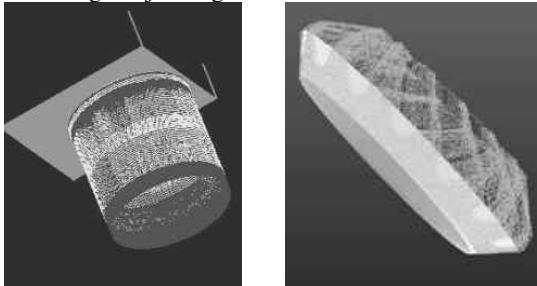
cylinder and plane fitting Fig. 10: taper fitting
